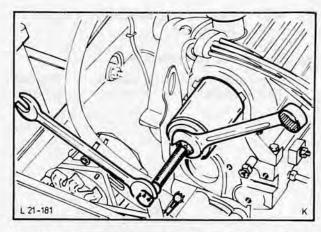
Fit camshaft oil seal using Special Tool 21-009-A
